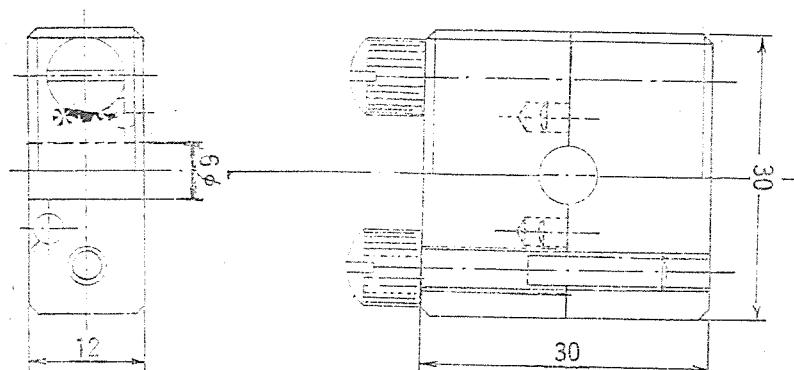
Mold for preparation of compressive and tensile strength test specimens.
